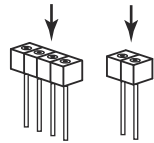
IDE Port Assembling To The FK1130 Circuit Board.
